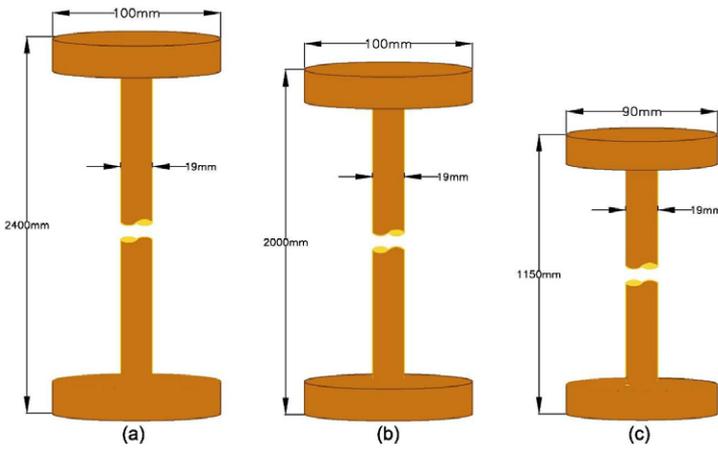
Wooden plugs used as a spacer in (a) Bench-1 and Bench-2 (b) Bench-3 (c) Bench-4
